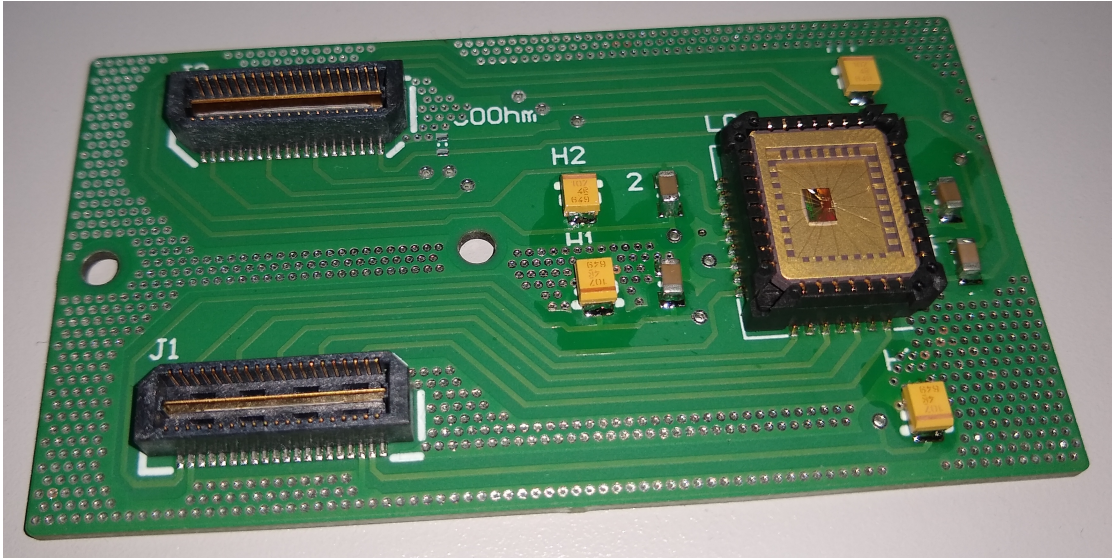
Photo of the soldered PCB with the wirebonded chip
